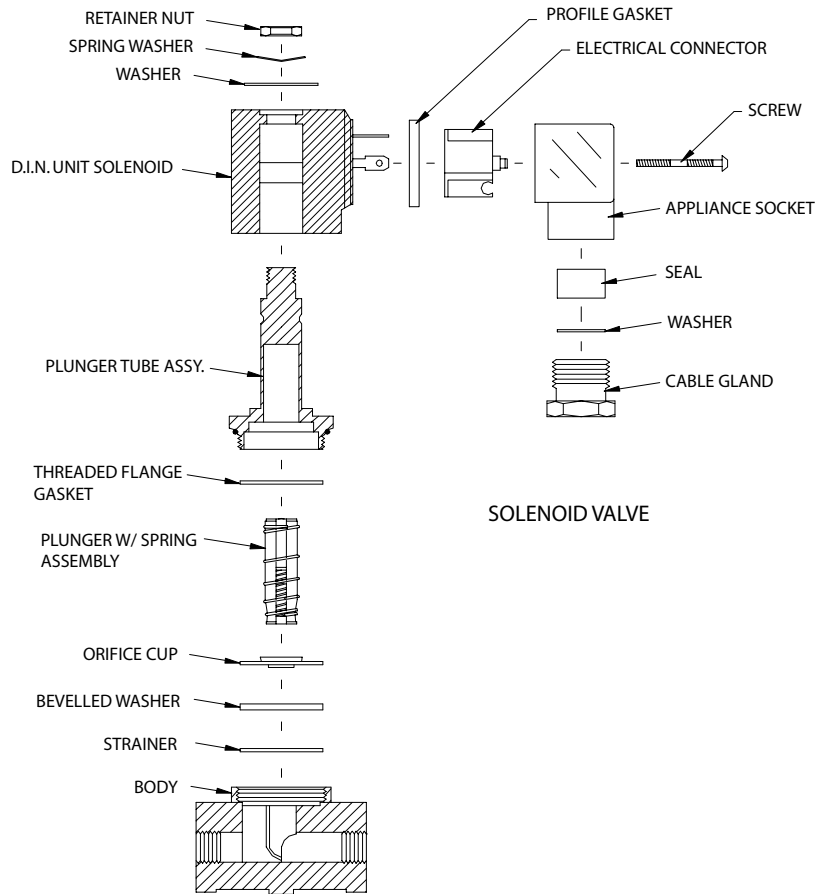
SOLENOID DRAIN ASSEMBLY
